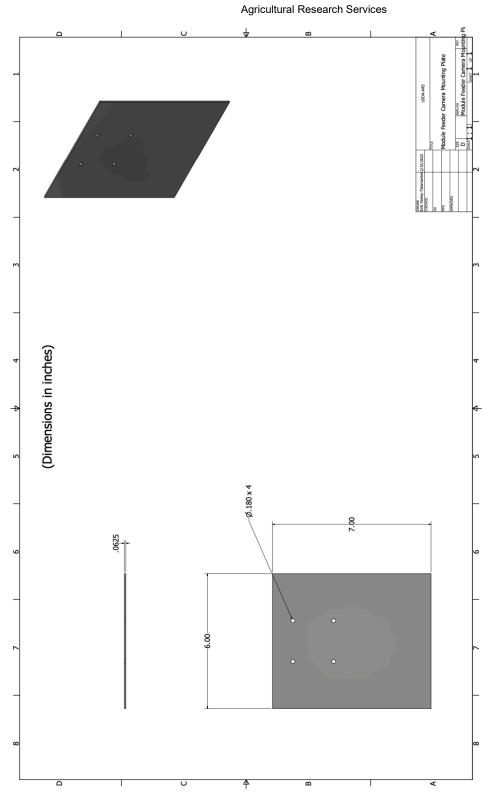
Module feeder camera mounting plate (#8 of assembly drawing).
